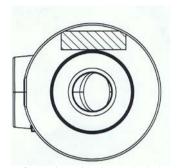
A scheme of a casting with the marked place from which the material for tensile specimens was taken
